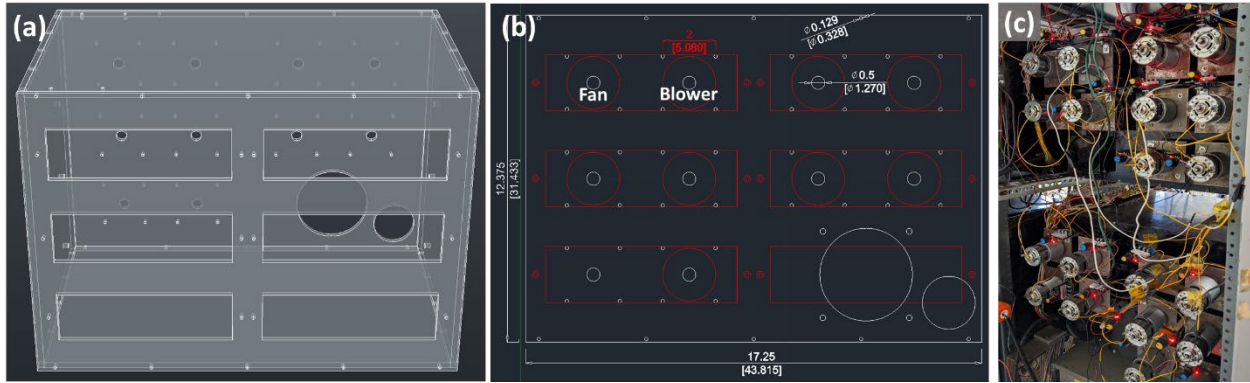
(a) Front CAD view of the modified EM oven in 3-D. (b) Back CAD view of the modified oven in 2-D. (c) The actual view of the back of the accelerated EM test oven.
